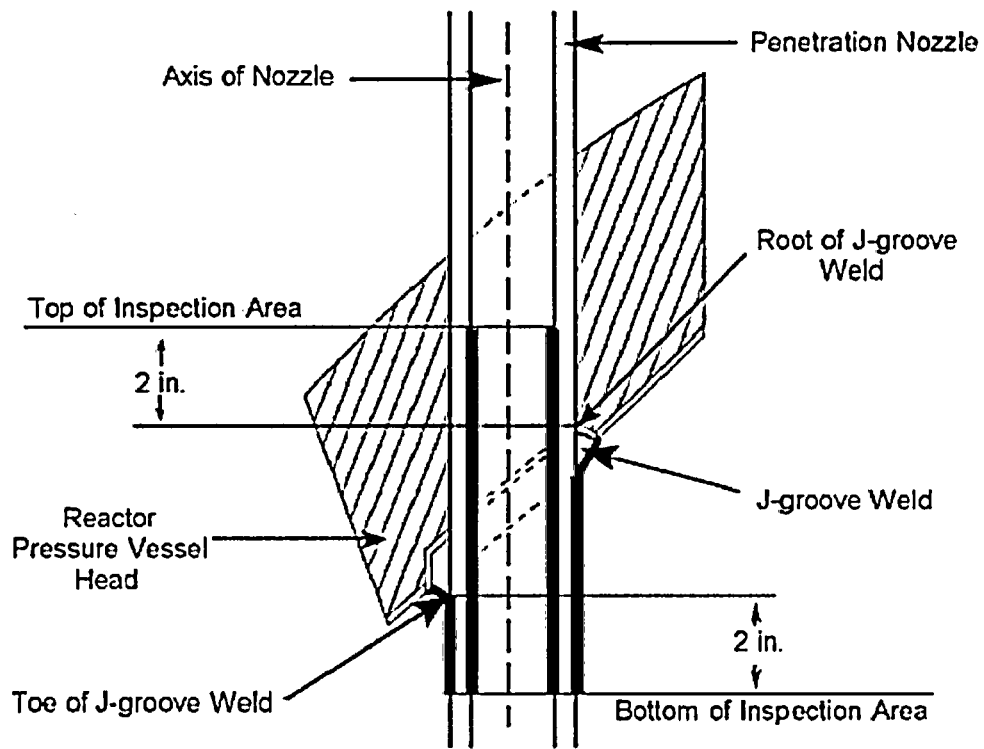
Required Wetted Surface Inspection Area Without Stress Analysis (The penetration nozzle and J-groove weld surface areas in black require surface inspection.)
